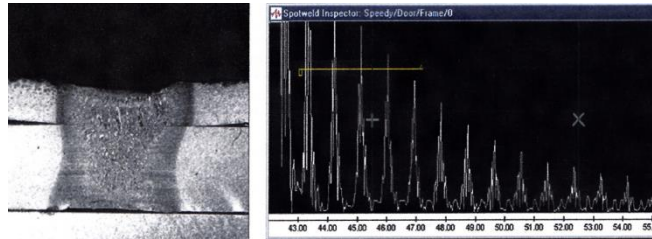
Lack of fusion between the second and third components of the three-sheet spot weld (a). A-scan image of the discrepant welded joint (b).
